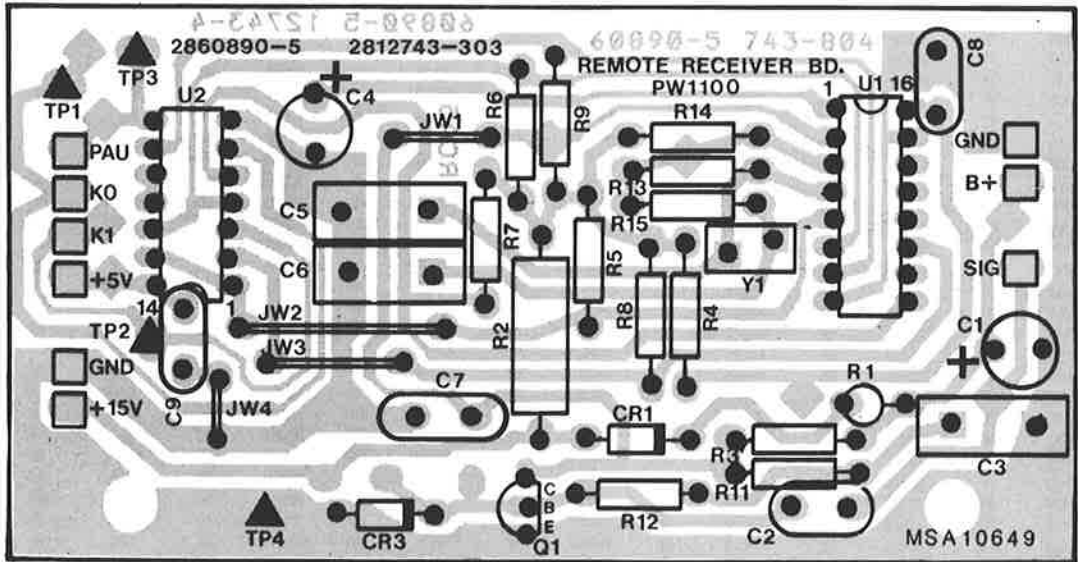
PW 1100 Circuit Board Assembly (SJT 300)
